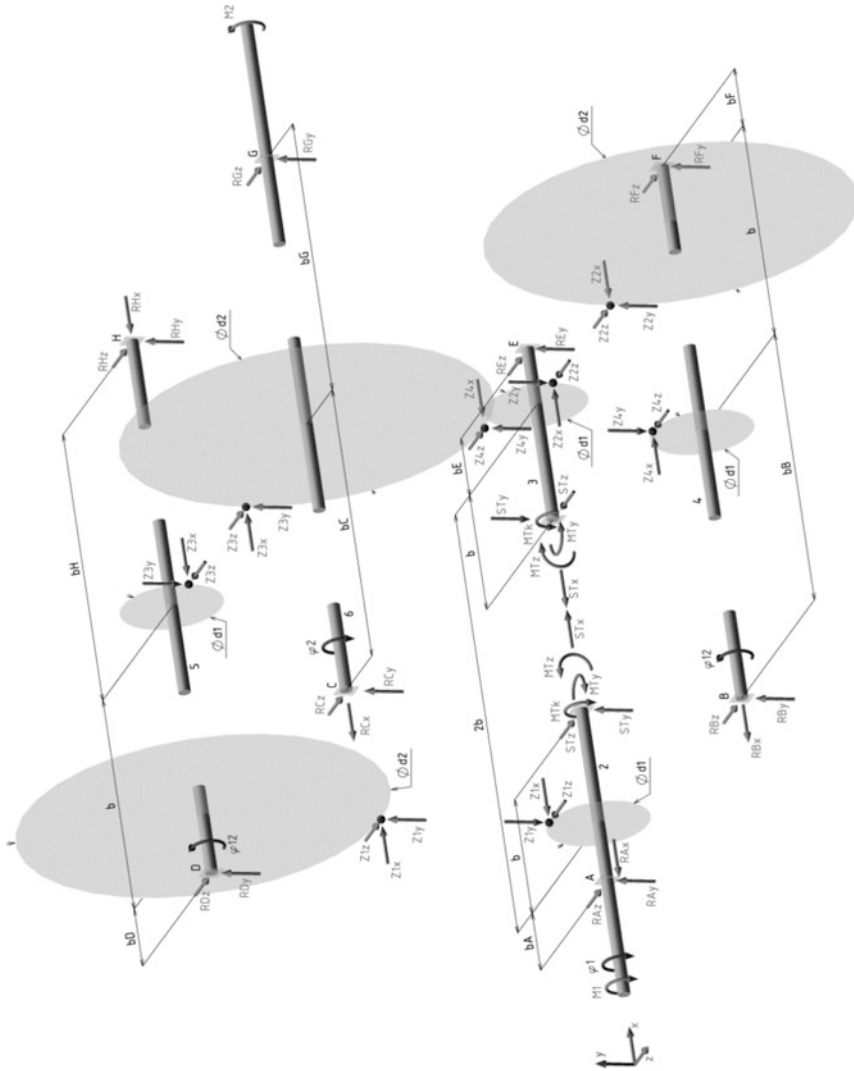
External forces and forces on bearings, gear meshes and within torsion-bar spring
